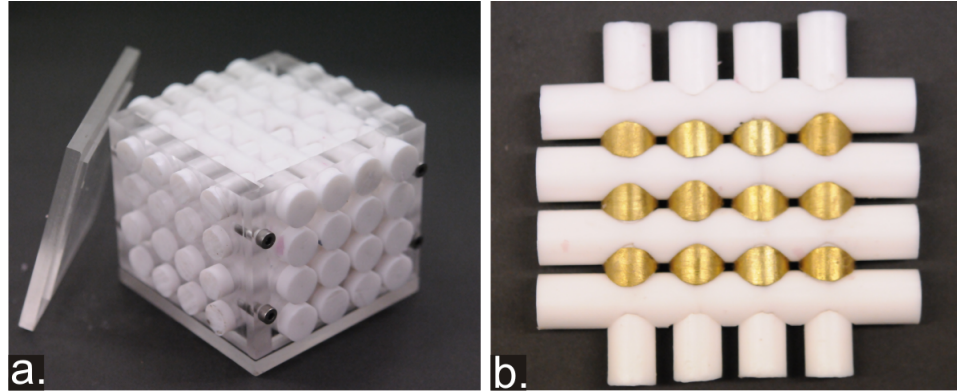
The 3D mould. (a) The mould consisted of a Perspex box which holds four platforms of interlocking PTFE rods in place. The rods were of contrasting diameter which enabled construction of the platforms. Experimental samples were manufactured by injecting Sil AD Soft in to the gaps between the rods. It was required to equalise the diameter of the two rod sets which was achieved by slotting tapered copper rings onto the small diameter rods as shown in (b). These platforms were used within the mould to manufacture the (0.60×0.60) cubic lattice
